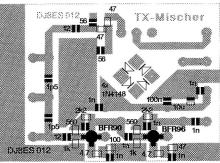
Layout of the transmit mixer. Left: component side, right: SMD component layout on track
